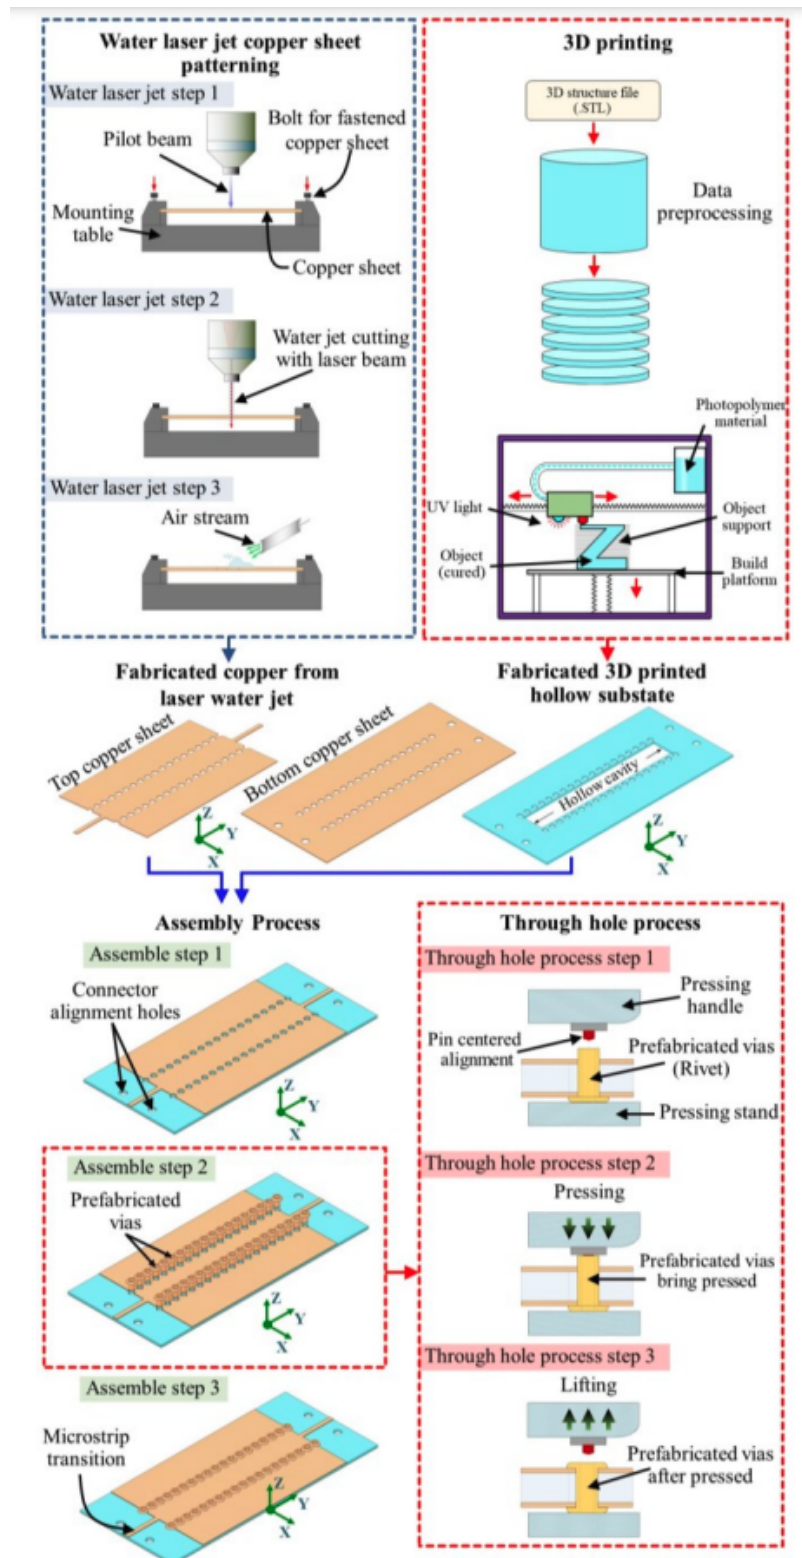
Process flow for 3D printed substrate, top and bottom copper sheet patterning and HSIW integration process
